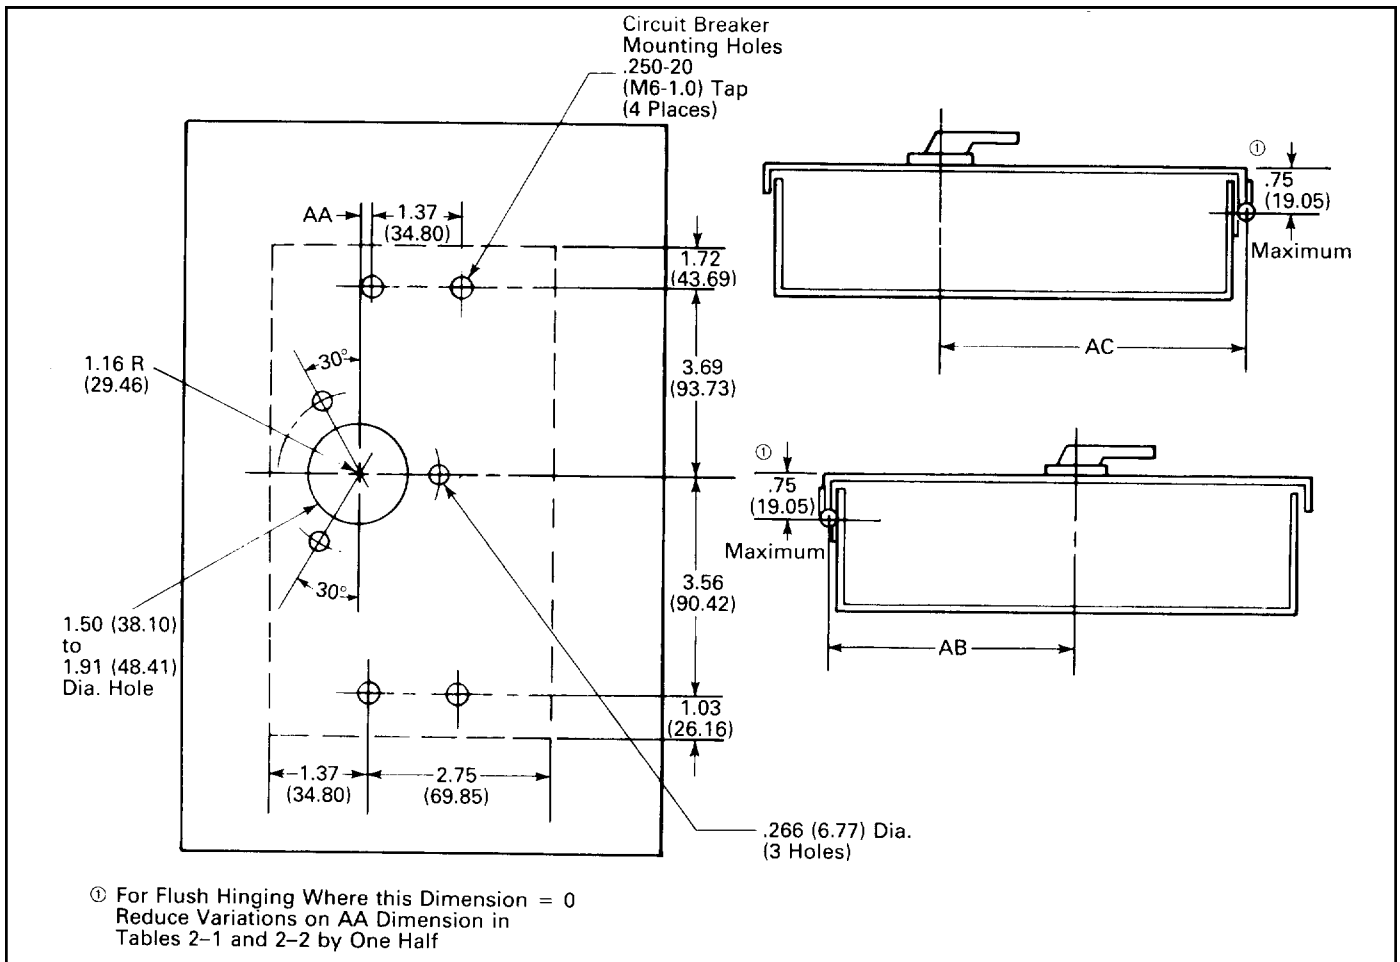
Enclosure Drilling Plan, J-Frame Series C Circuit Breaker
